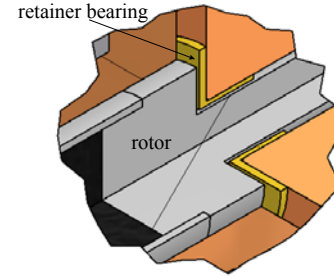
Detailed view on the retainer bearings, which protects for both axial and radial disturbances.
